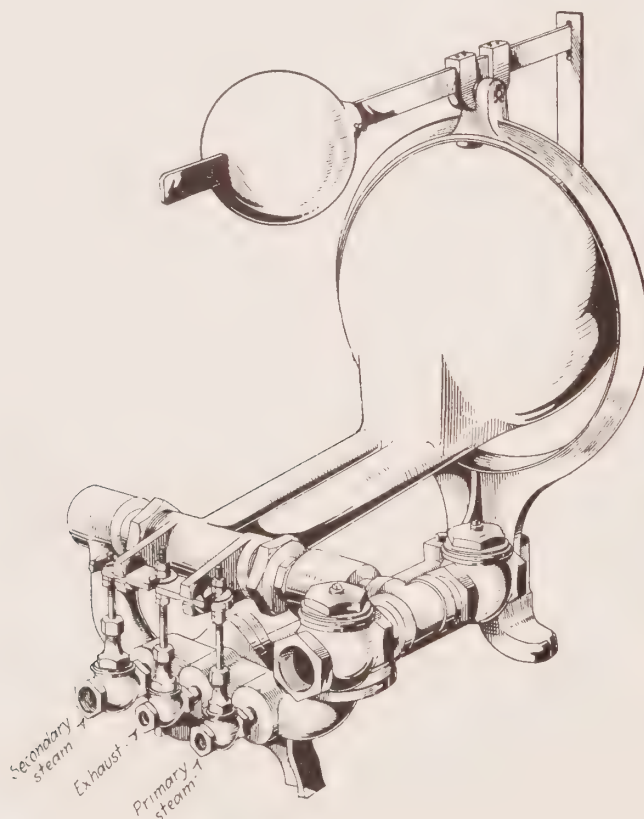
Another Pilot Valve arrangement used on Dumping Traps.
